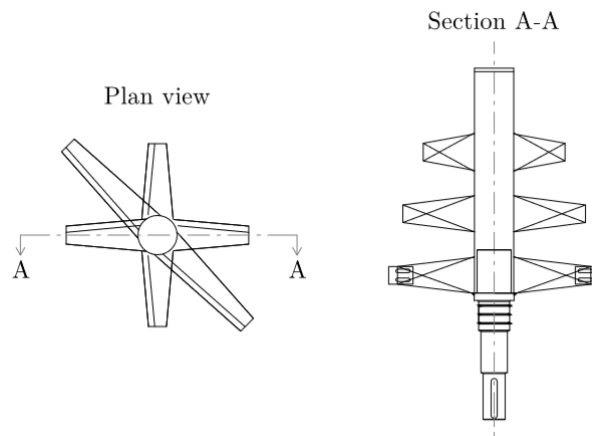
Construction details of the Pressurized Rotating Mixer. Technical drawing of the warped blades.
